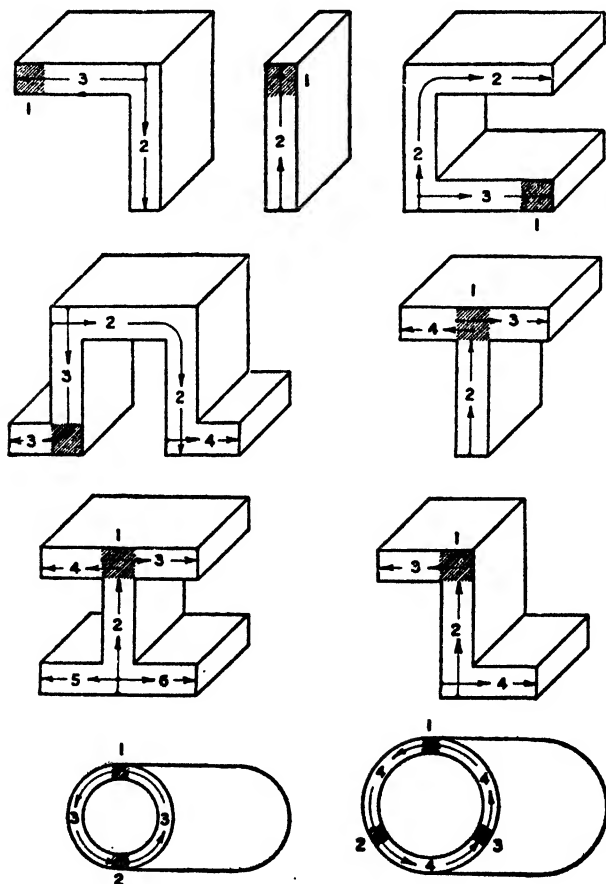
Position and direction of butt welds on various sections and tubes. Jack welds are shown shaded, and subsequent welding is done in order and direction of arrows.
